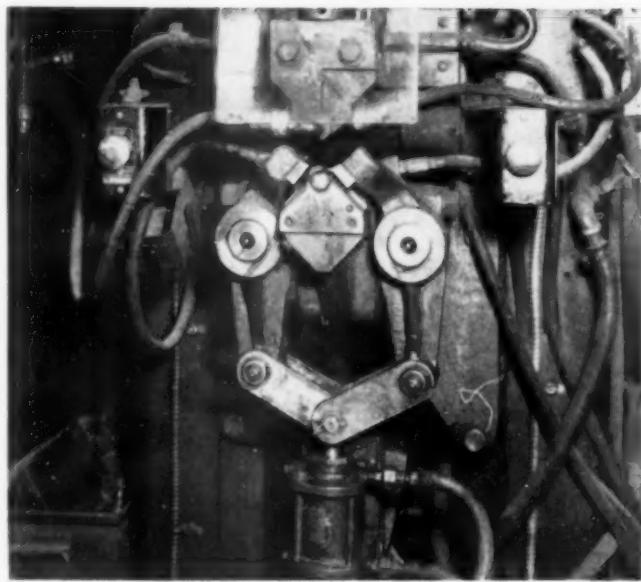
Fixture above is used in mash-welding a thin strip of steel to close the corners of a folded box.
